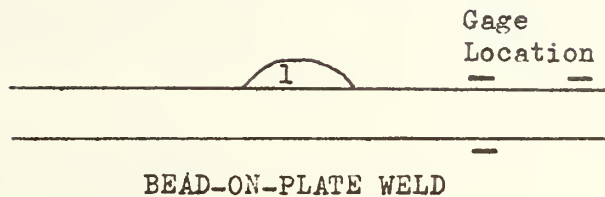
WELDING PASS SEQUENCE.
